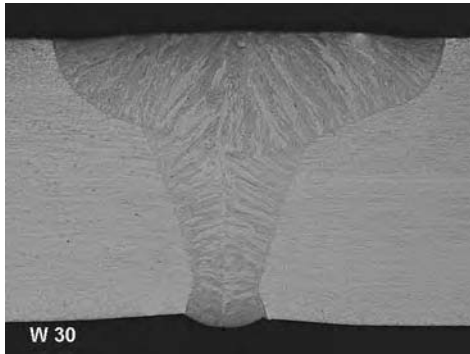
Butt joint using keyhole plasma arc welding root pass and gas tungsten arc welding fill pass. Courtesy of Edison Welding Institute
